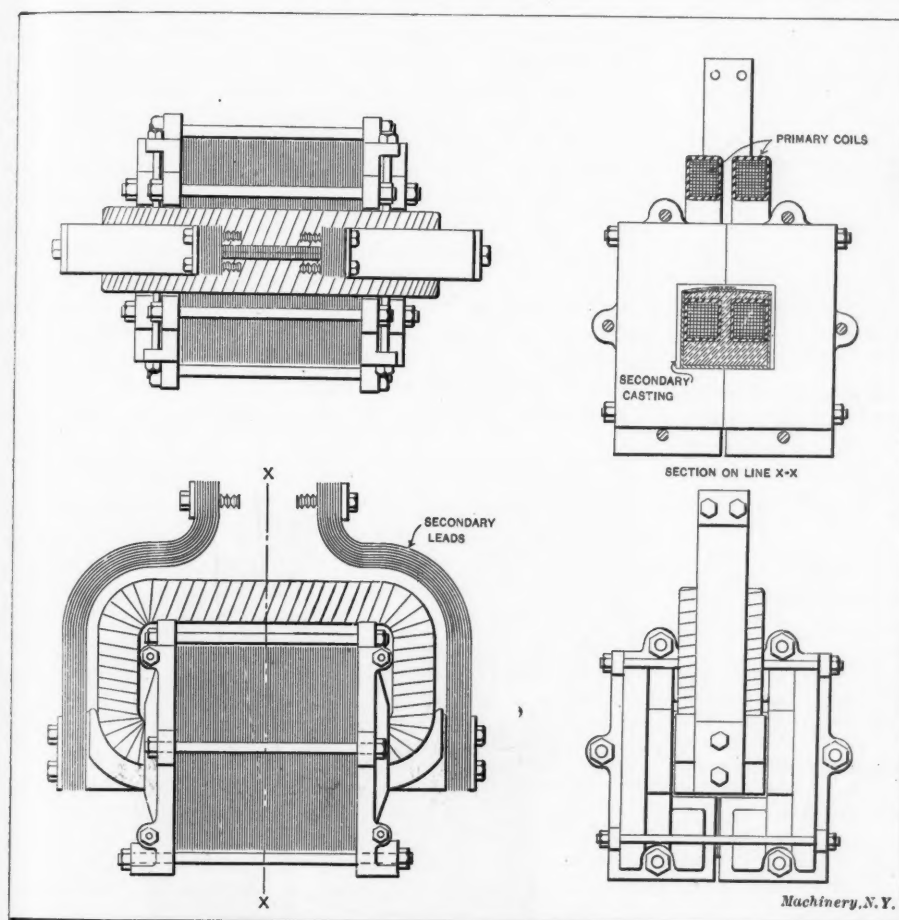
Elevations and Section of a Typical Transformer for Welding Machines
